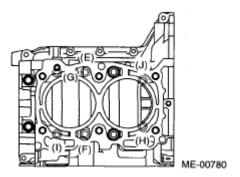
Identifying Cylinder Block Bolts Tightening Sequence (RH Side) Courtesy of SUBARU OF AMERICA, INC.
